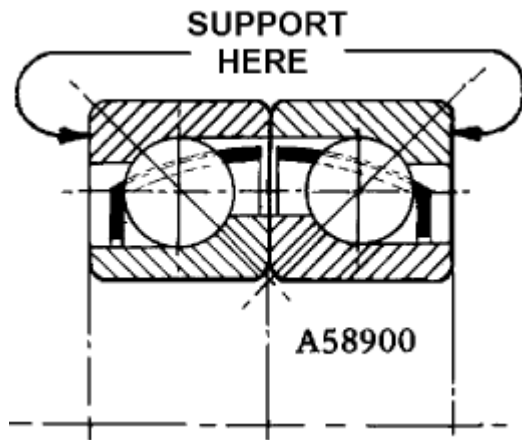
5 – ANGULAR CONTACT BEARING ASSEMBLY
